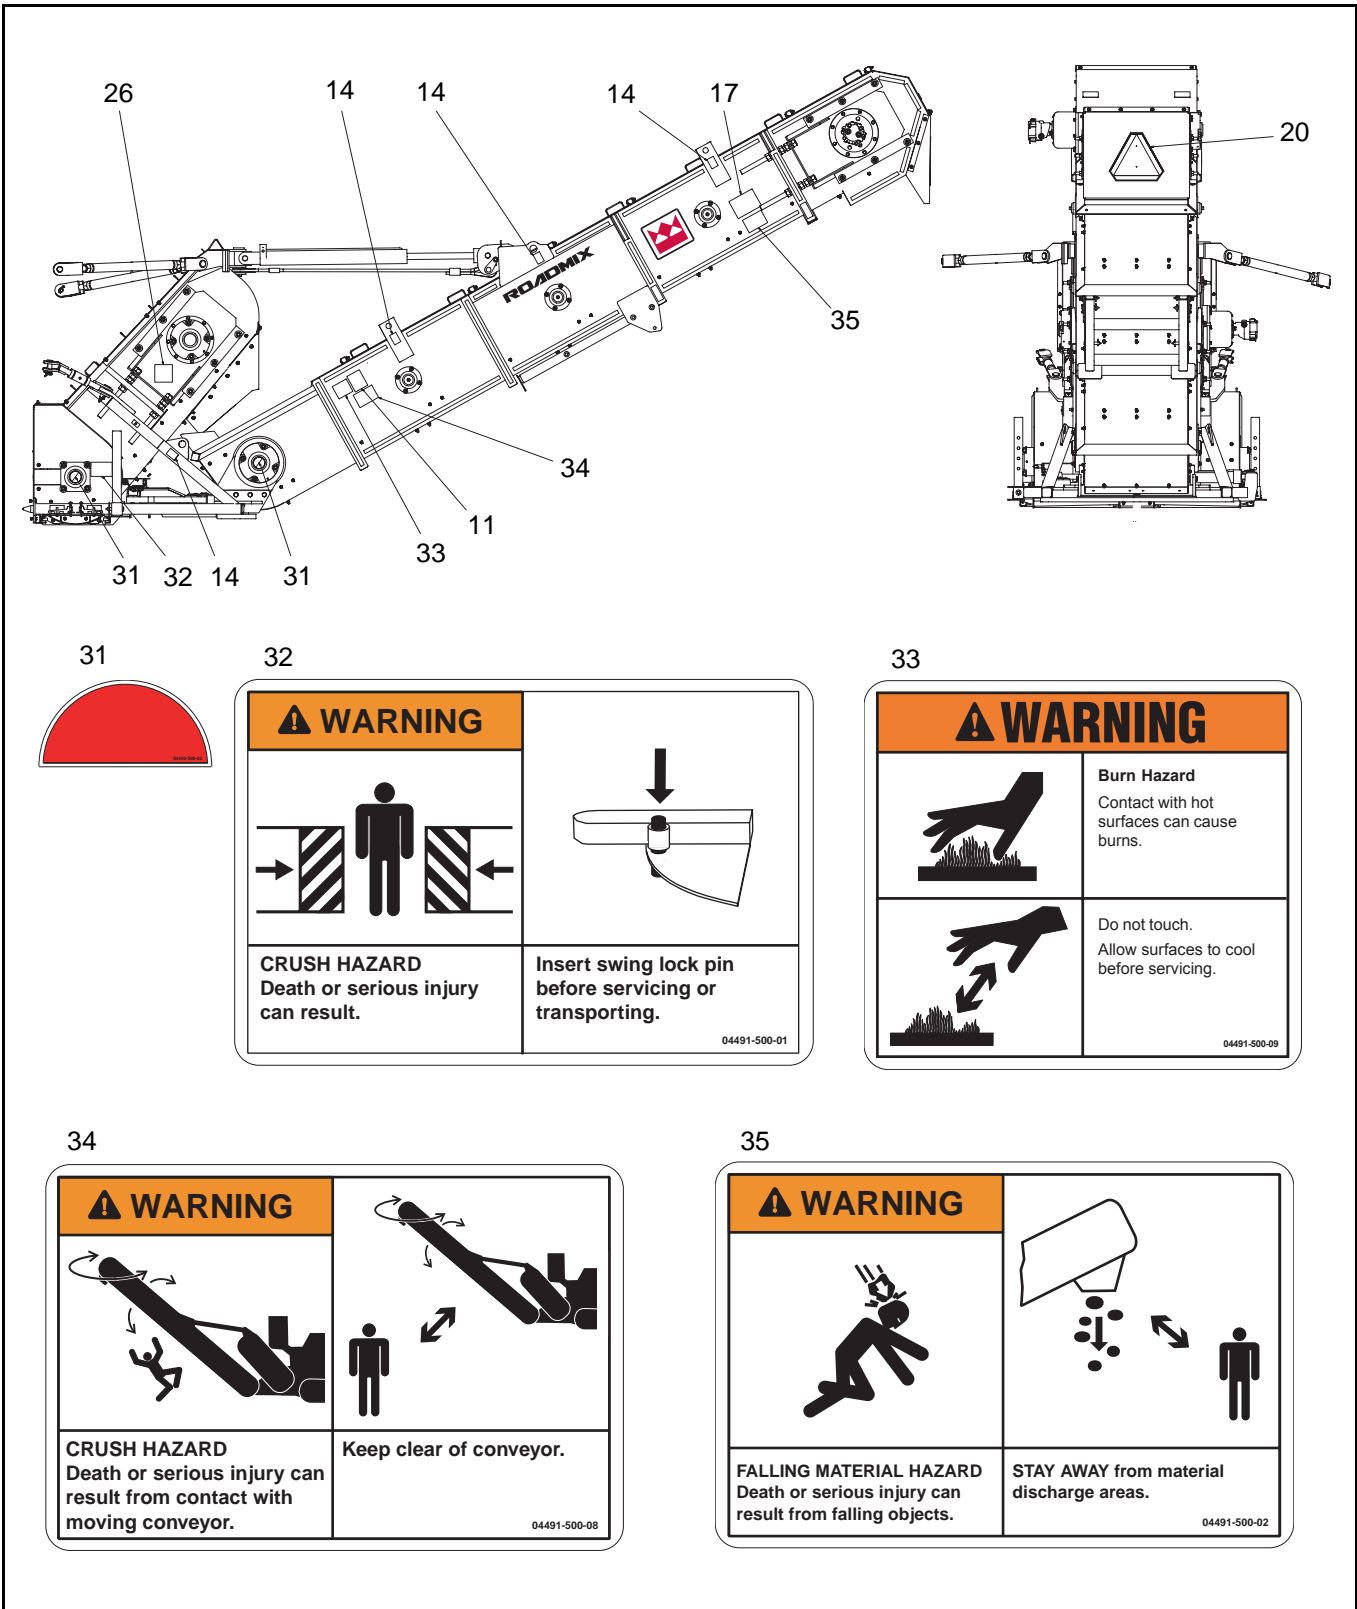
7 Decal Locations - Conveyor Side and Rear Views
